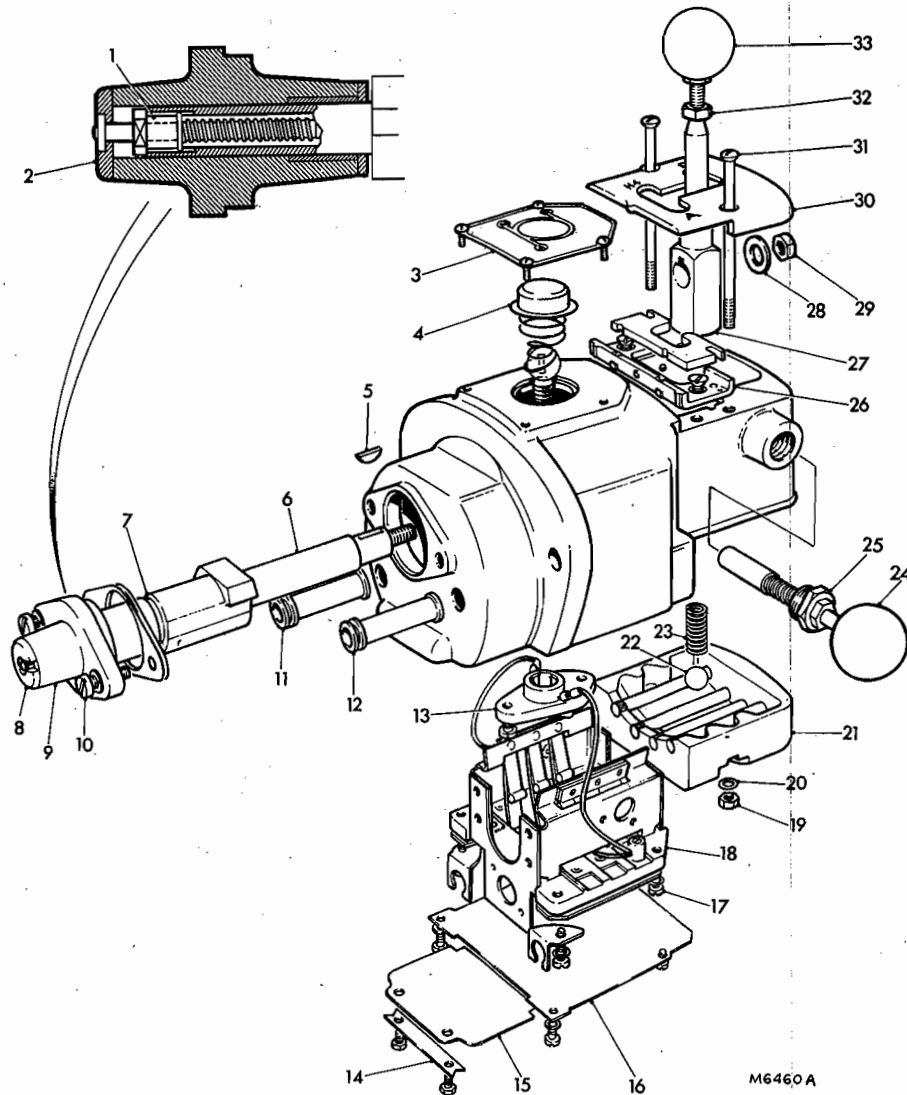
EXPLODED VIEW OF GEAR SELECTOR SWITCH
